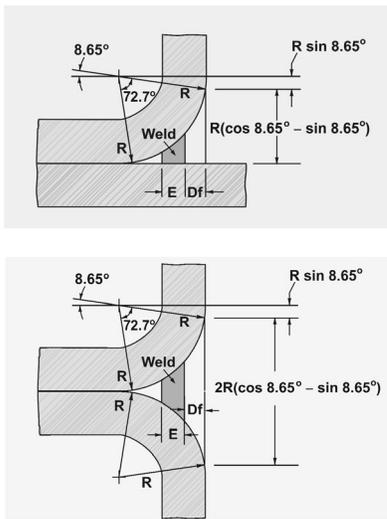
Flare Bevel and Flare-V Weld Faces Related to HSS Radius.
